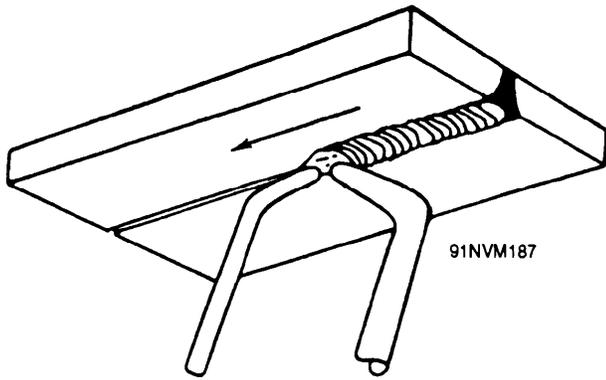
Welding a butt joint in the overhead position.
